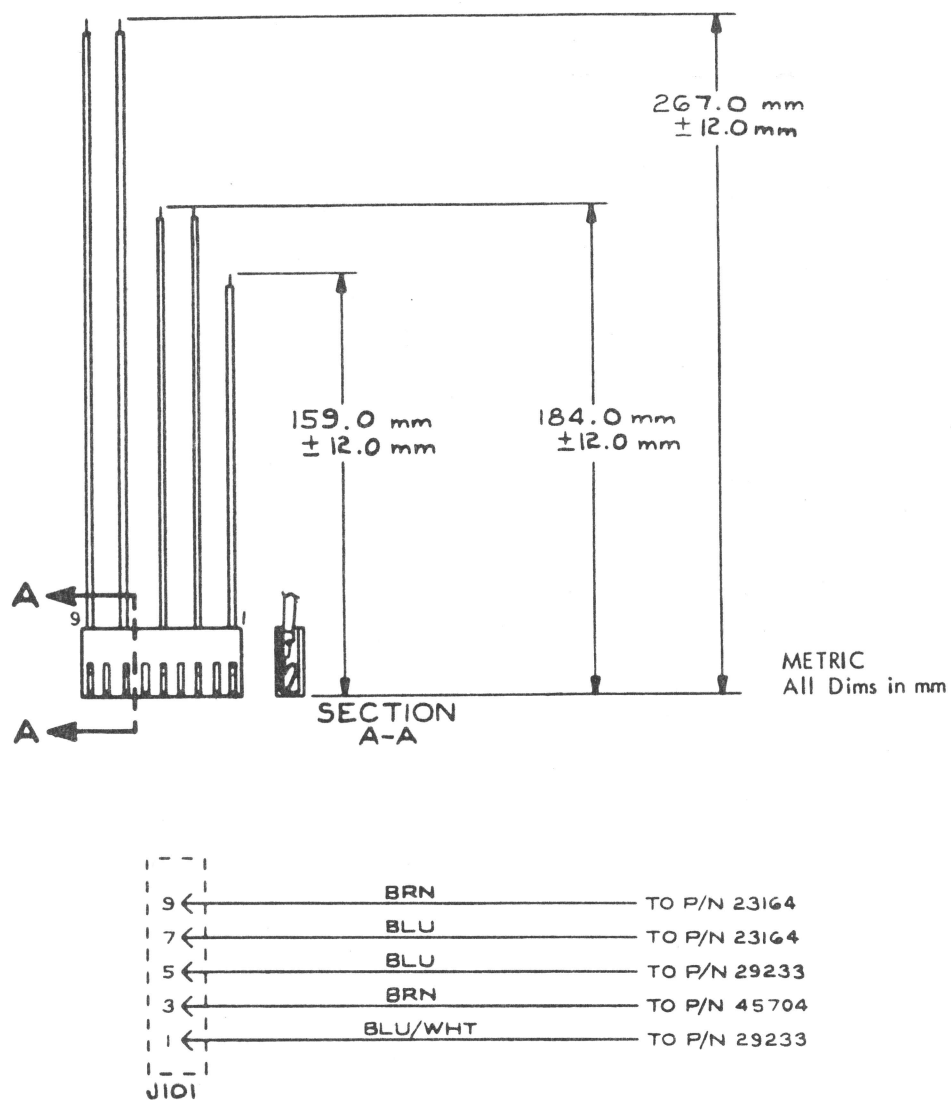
Back Panel-to-Power Supply Cable Assembly (P/N 47115)
